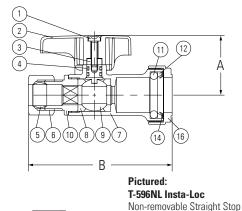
NL Insta-Loc II Removable Straight Stop Cut-away view
